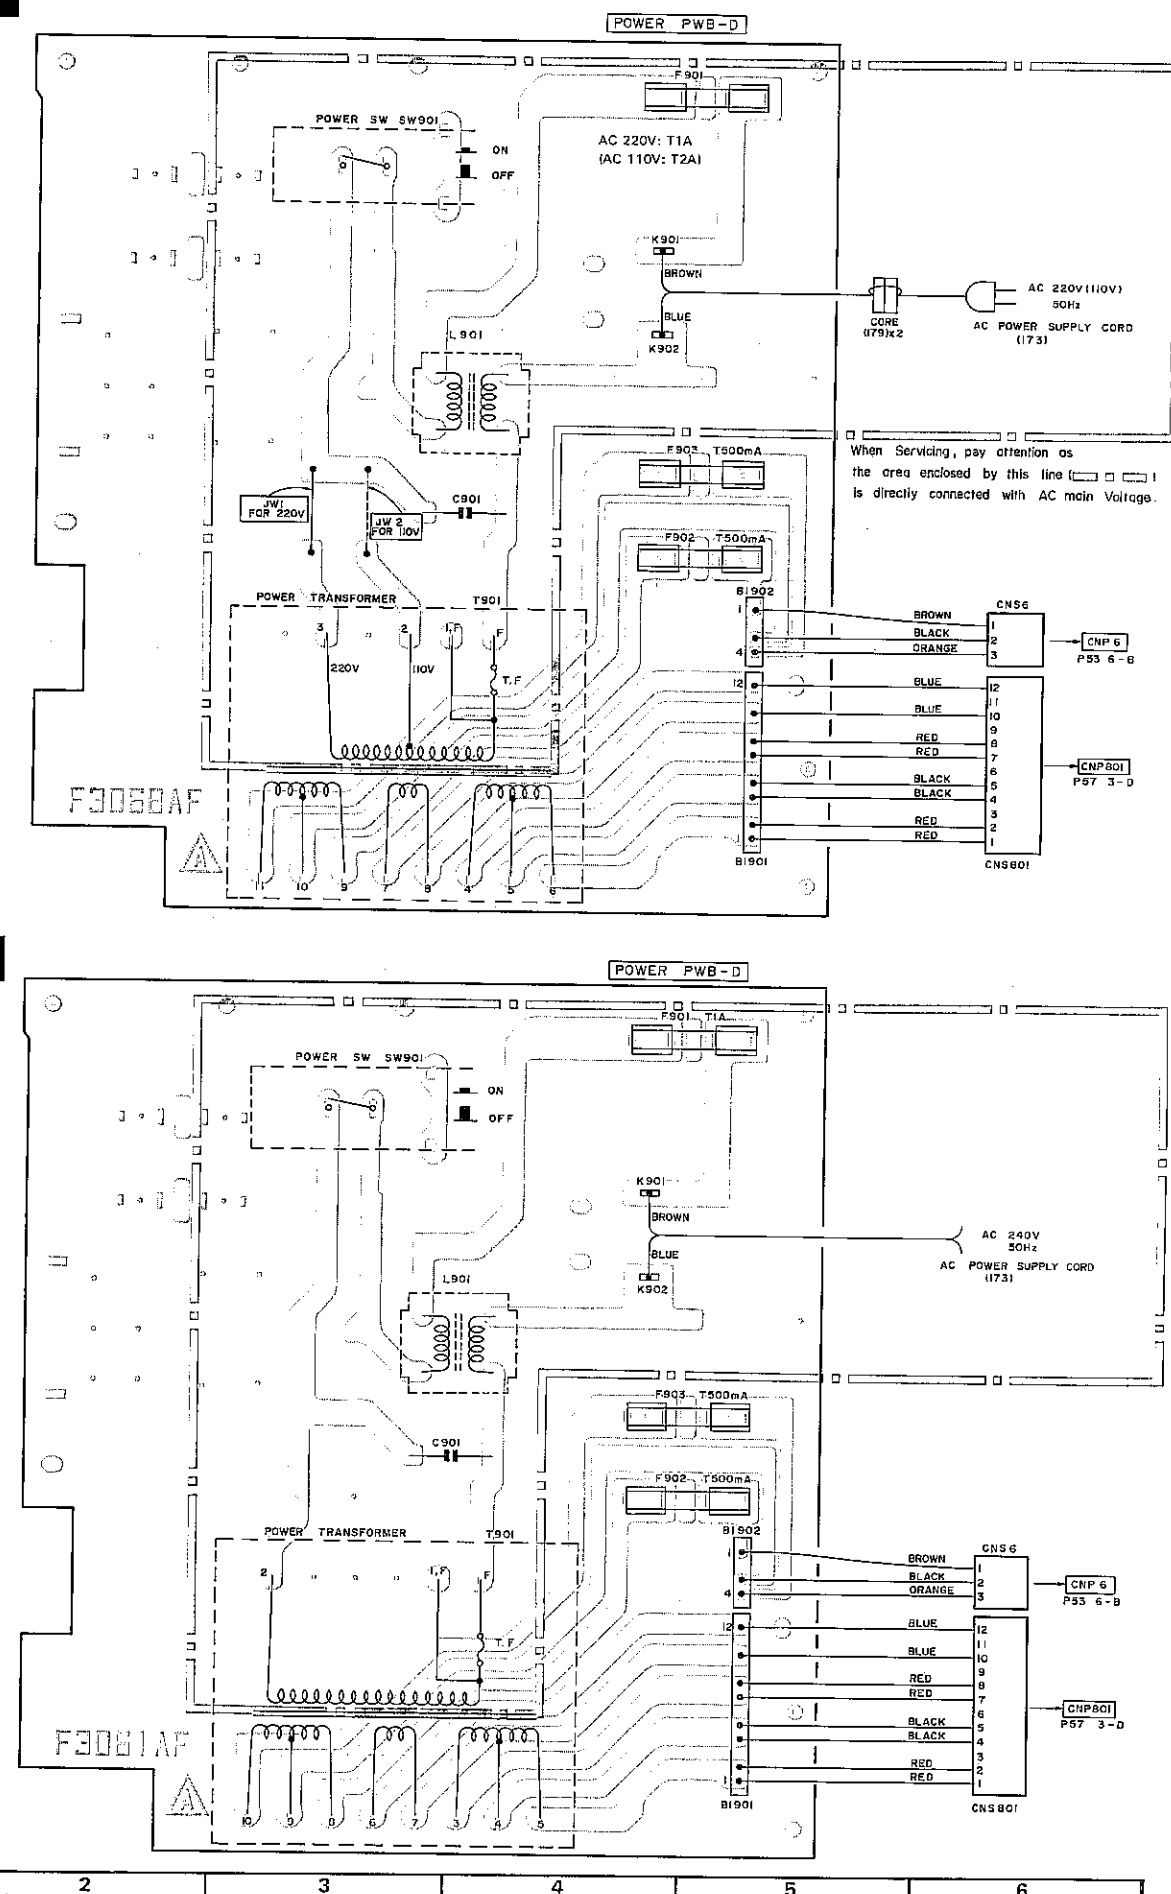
WIRING SIDE OF P.W. BOARD (5/6)
